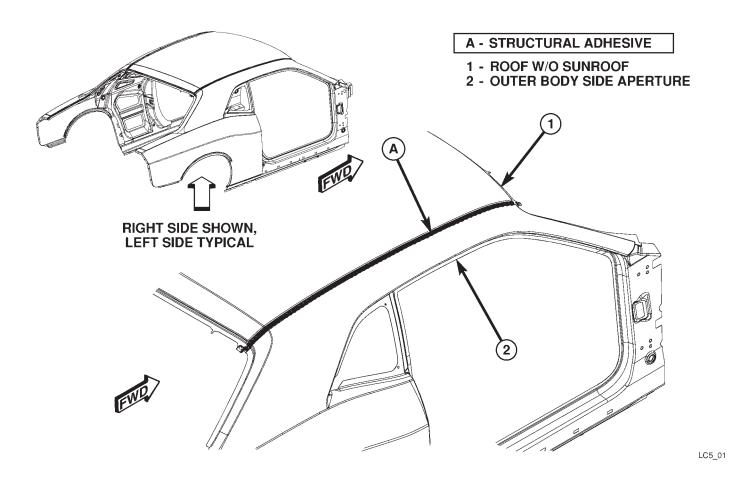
FRAMED BODY IN WHITE WITHOUT CLOSURES WITHOUT SUN ROOF
